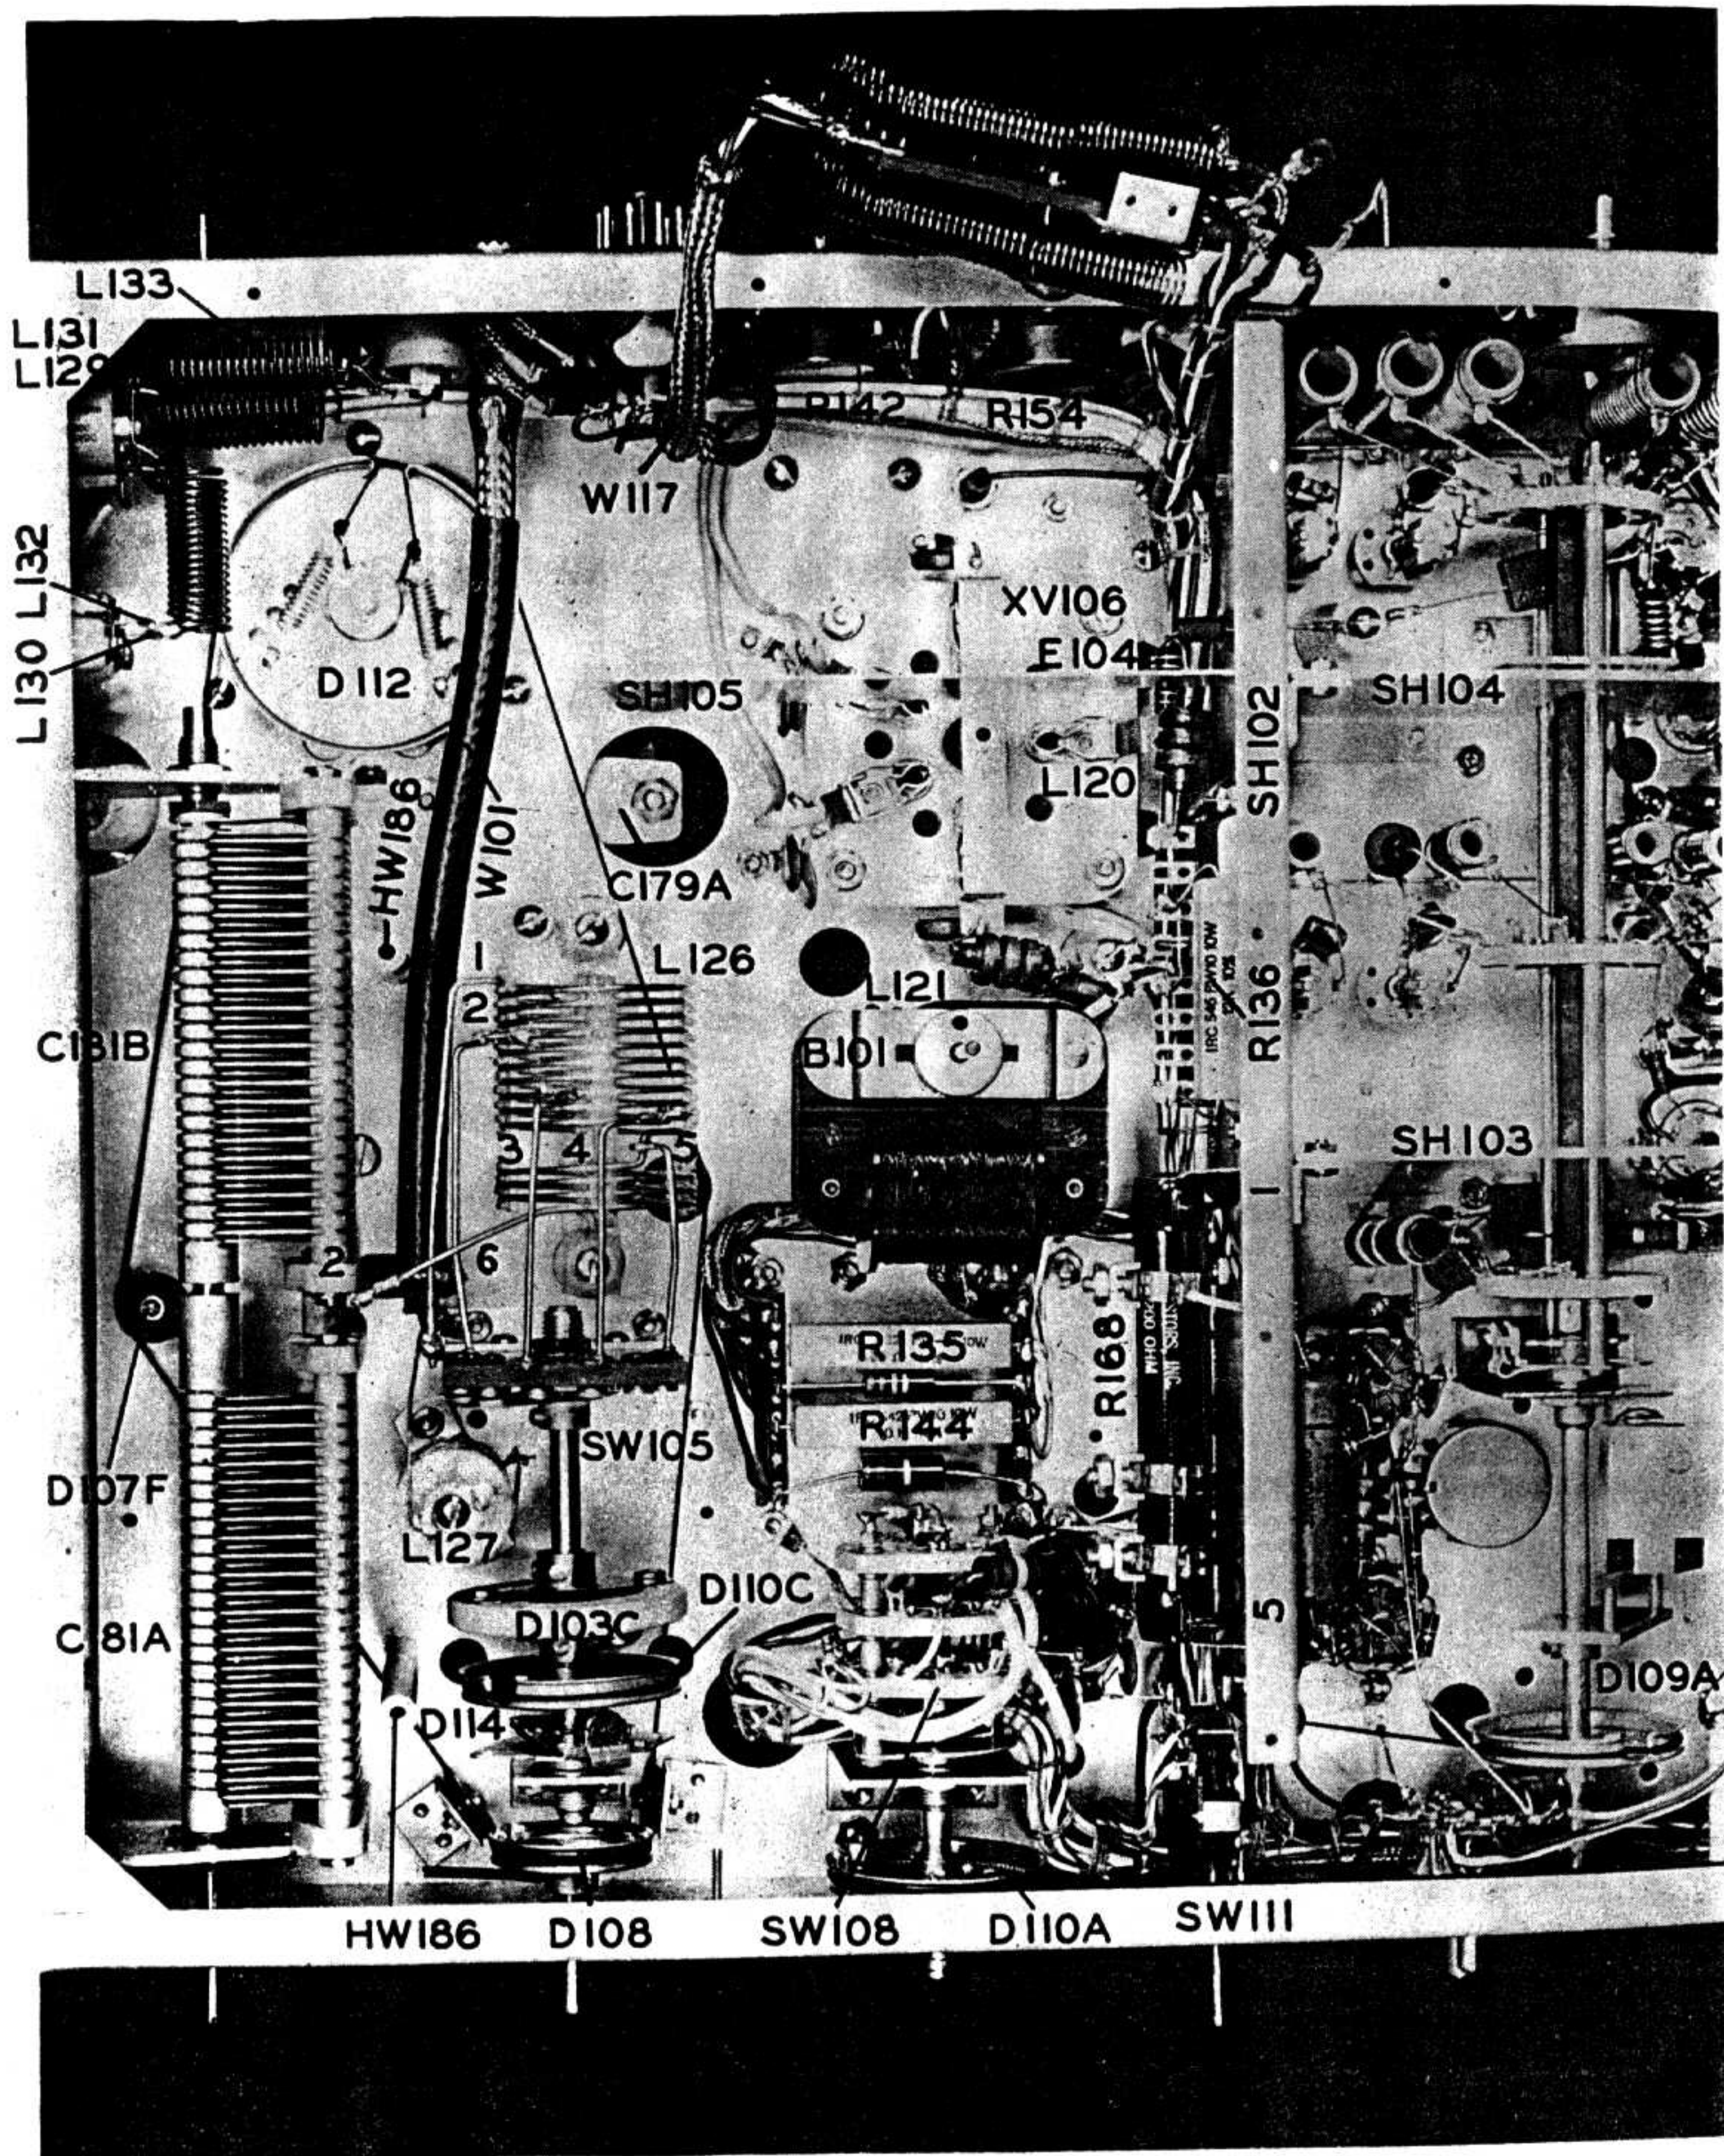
, Bottom View of Power Amplifier - Filter Board Assembly Removed
